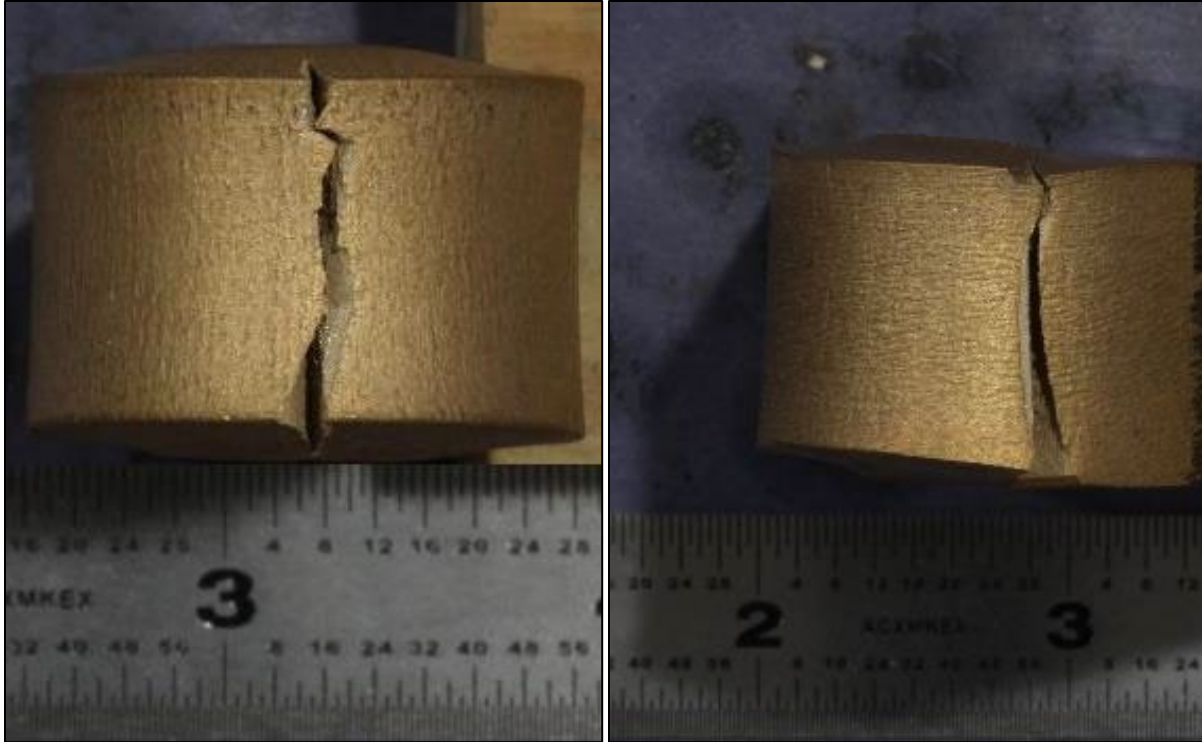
Photographs of aluminum bronze bend test samples after testing. Left: Sample 1 (parallel to Z-axis). Right: Sample 2 (perpendicular to Z-axis).
